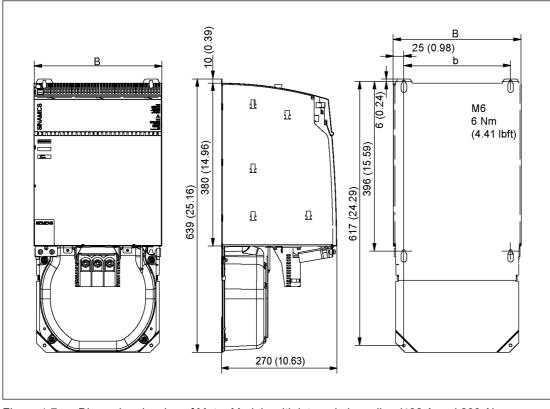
Dimension drawing of Motor Module with internal air cooling (132 A and 200 A)
